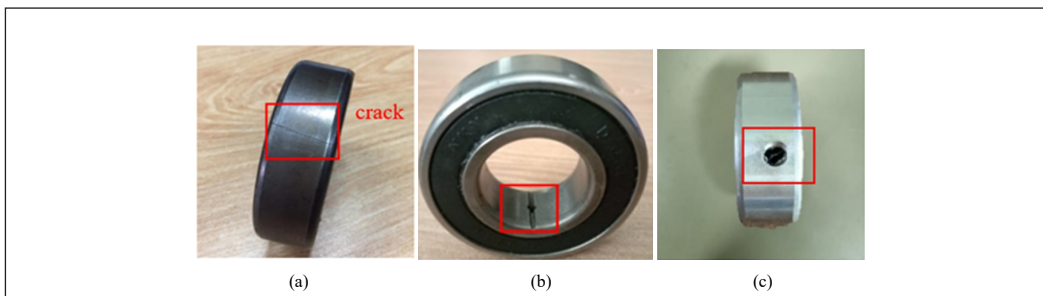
Test bearings for ship propulsion motors: (a) outer race minor defect; (b) inner race minor defect; (c) outer race serious damage
